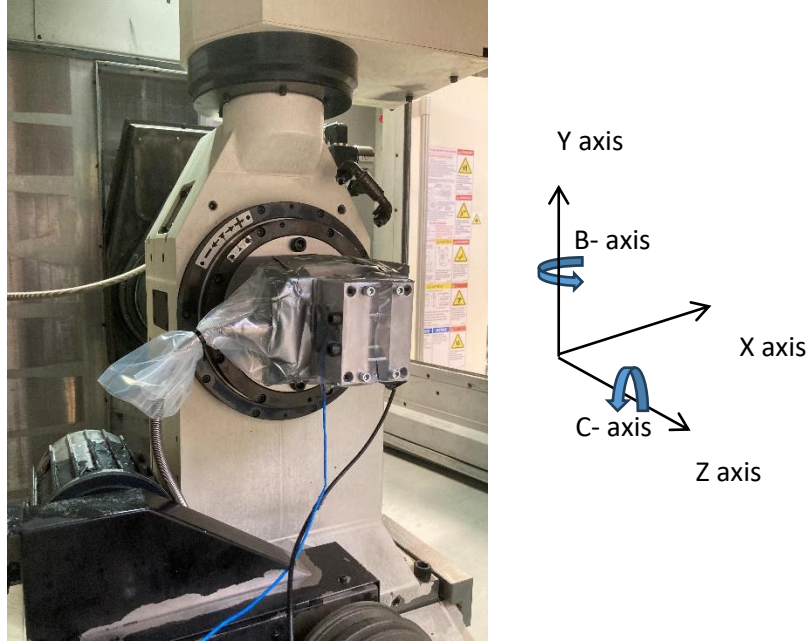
Setup of workpiece fixture onto dynamometer attached to pallet held on machine. Sketch shows the coordinate system used to represent the motion while grinding with respect to the machine.
